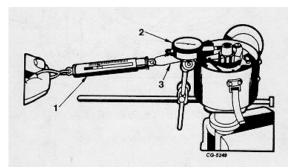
Shaft and Bushing Wear Test (Checking Distributor Shaft Side Play)
